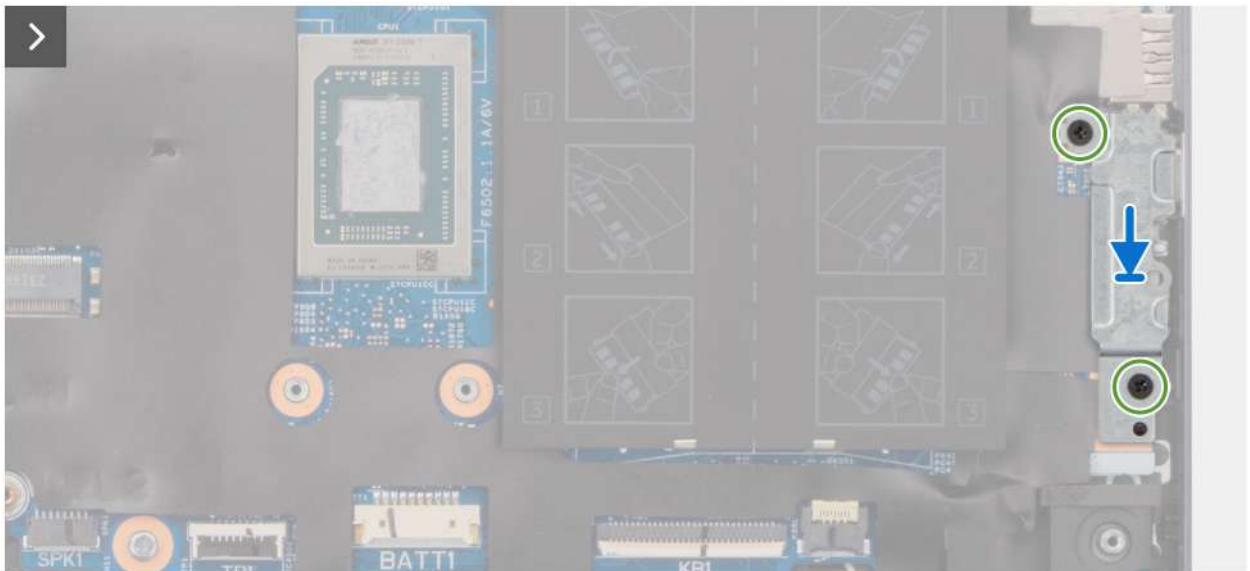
Installing the system board (for computers shipped with an aluminum chassis)
